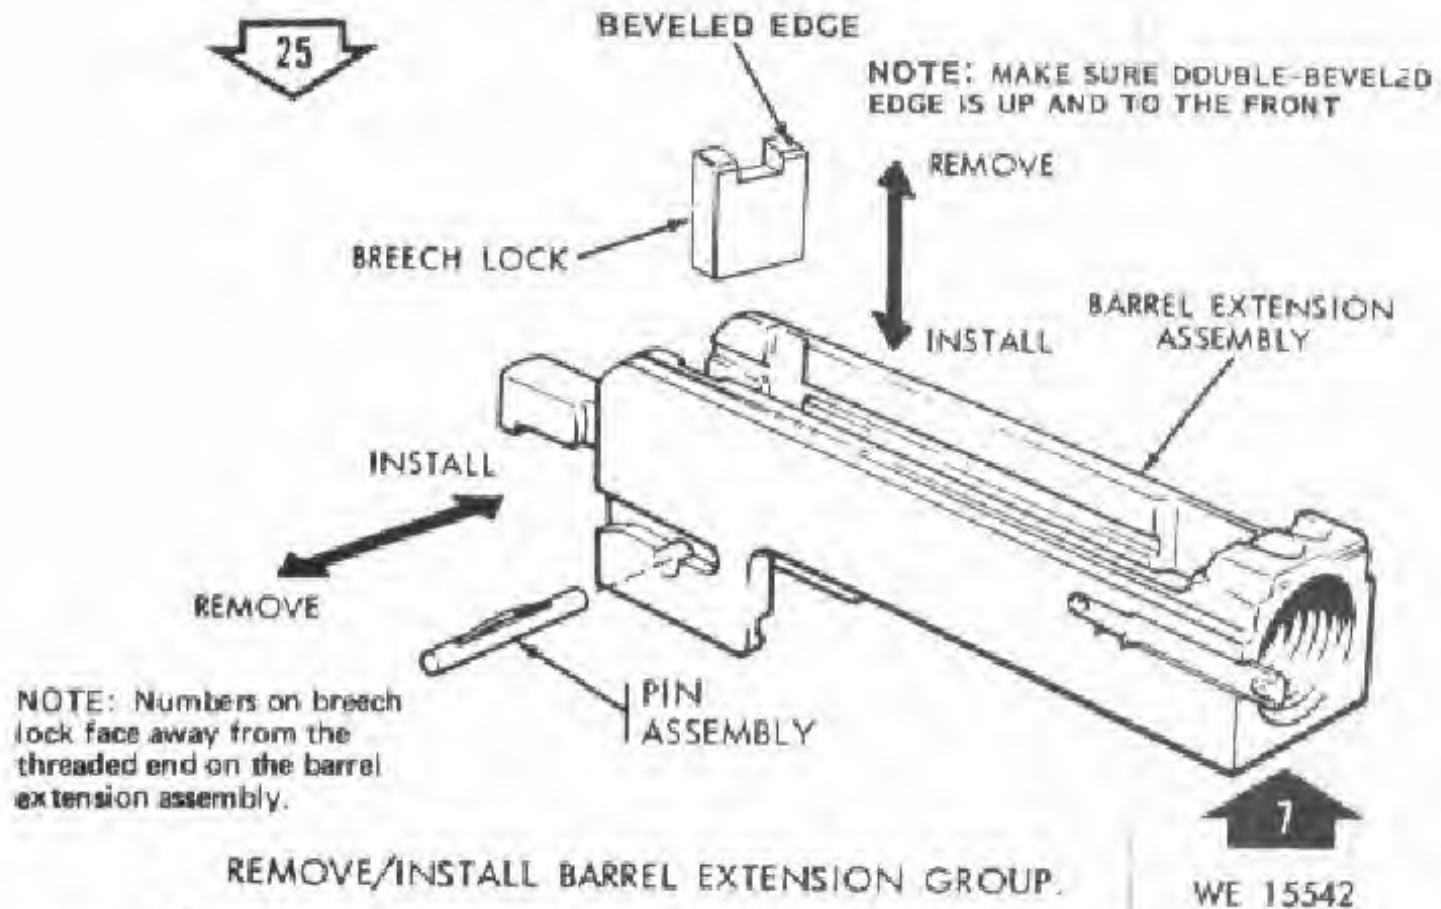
Disassembly/assembly of Caliber .50 Machine Gun, M2.
